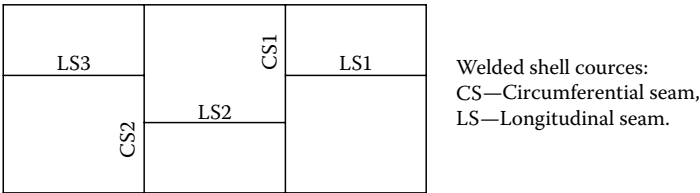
Welded shell courses (CS, circumferential seam and LS, longitudinal seam).
